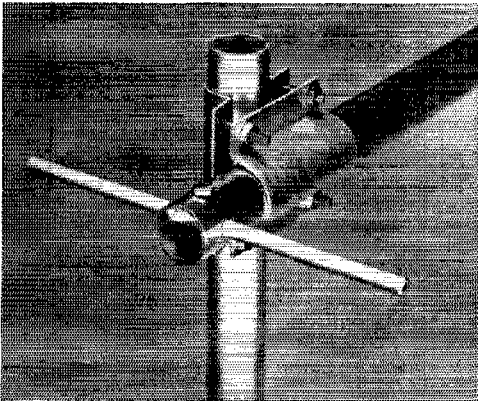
Mockup showing clamps for assembling the framework of the 2-meter array. Mounting method for the elements is also illustrated.
